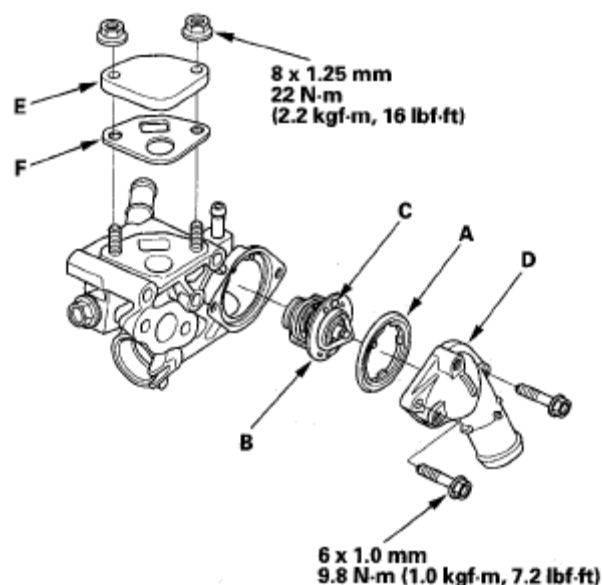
Identifying Rubber Seal, Thermostat, Pin And Thermostat Cover
